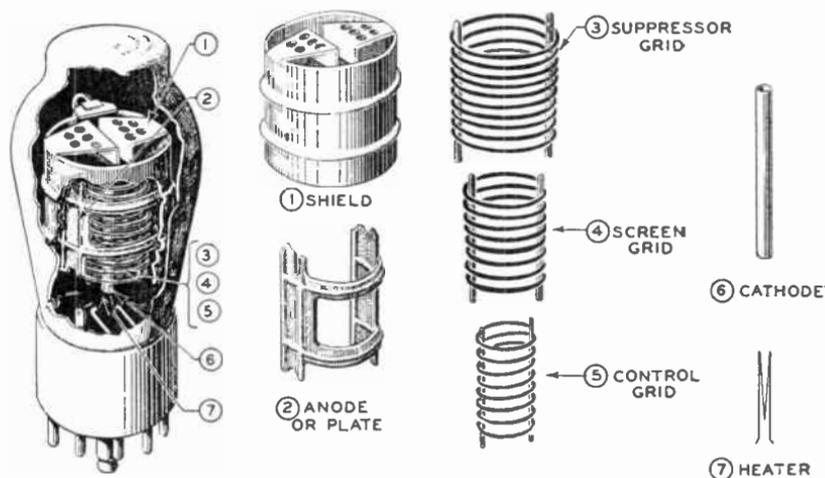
A Cutaway View of a Pentode Tube and Enlarged Detail of the Separate Parts
